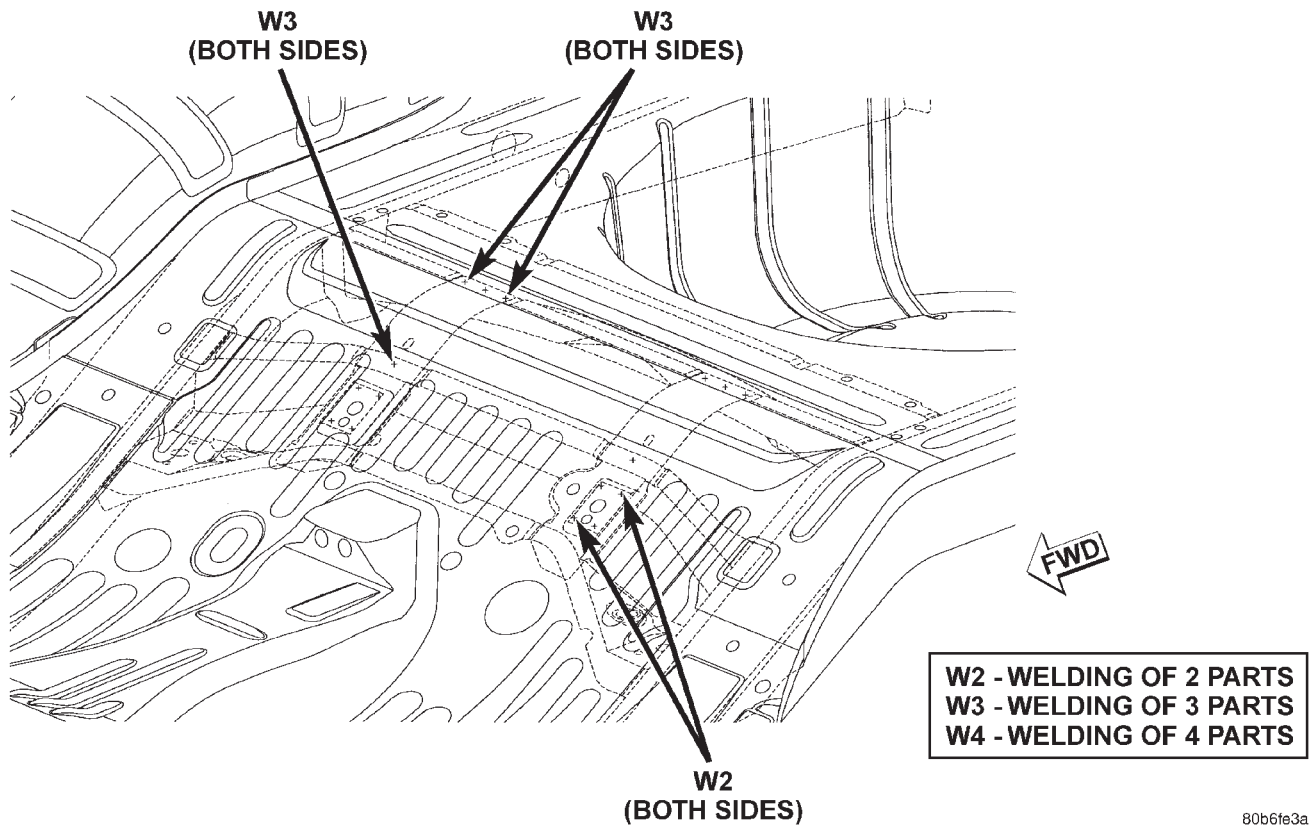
REAR INBOARD SEAT BELT REINFORCEMENT TO FLOOR PAN
